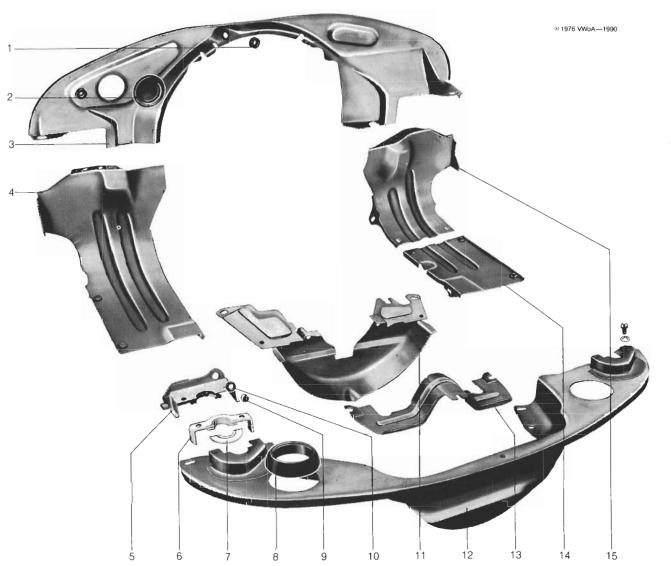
is an exploded view of the 1600 engine's cover plates and air duct lower parts. The right-hand air duct lower part must be removed for access to the thermostat. All of the components shown in Fig. 6-4 are held to the engine by fillister head screws. The removal of the various plates and ducts will be apparent from an inspection of the engine. During installation of the rear cover plate, it is essential that the plate correctly engage the rubber seal on the vehicle's body.
